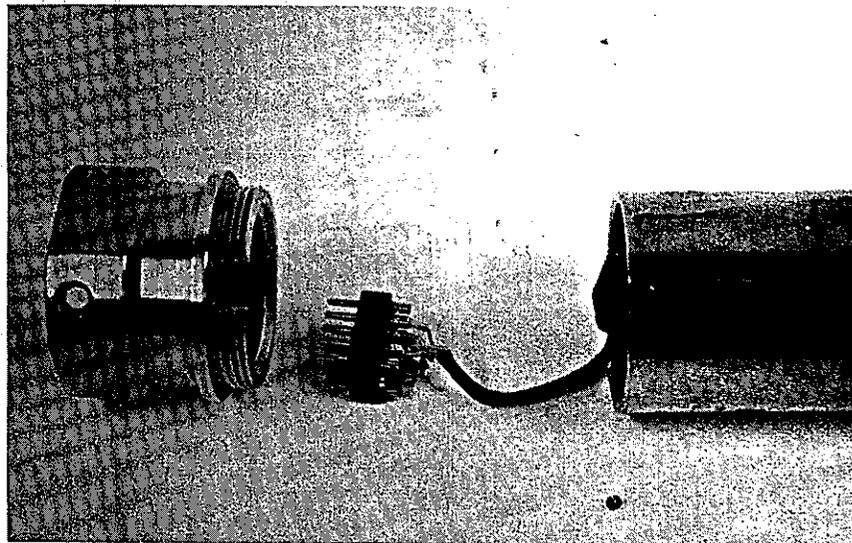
Octagonal ring nut, small set screw, wire bundle, and connector to moisture detection cylinder.
